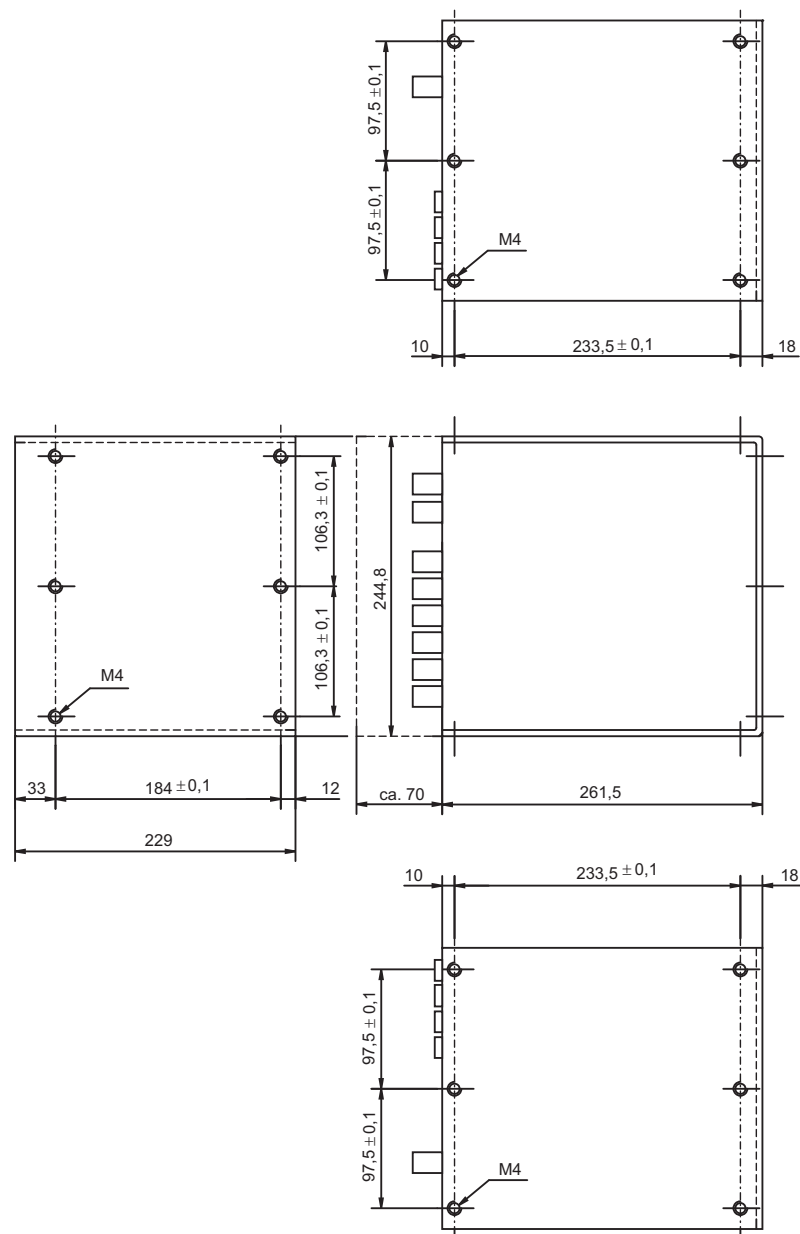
2 Dimension of the Base Unit housing, standard version
